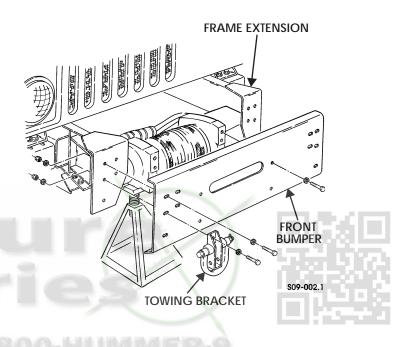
Front Bumper and Towing Brackets for Vehicles With Winch
